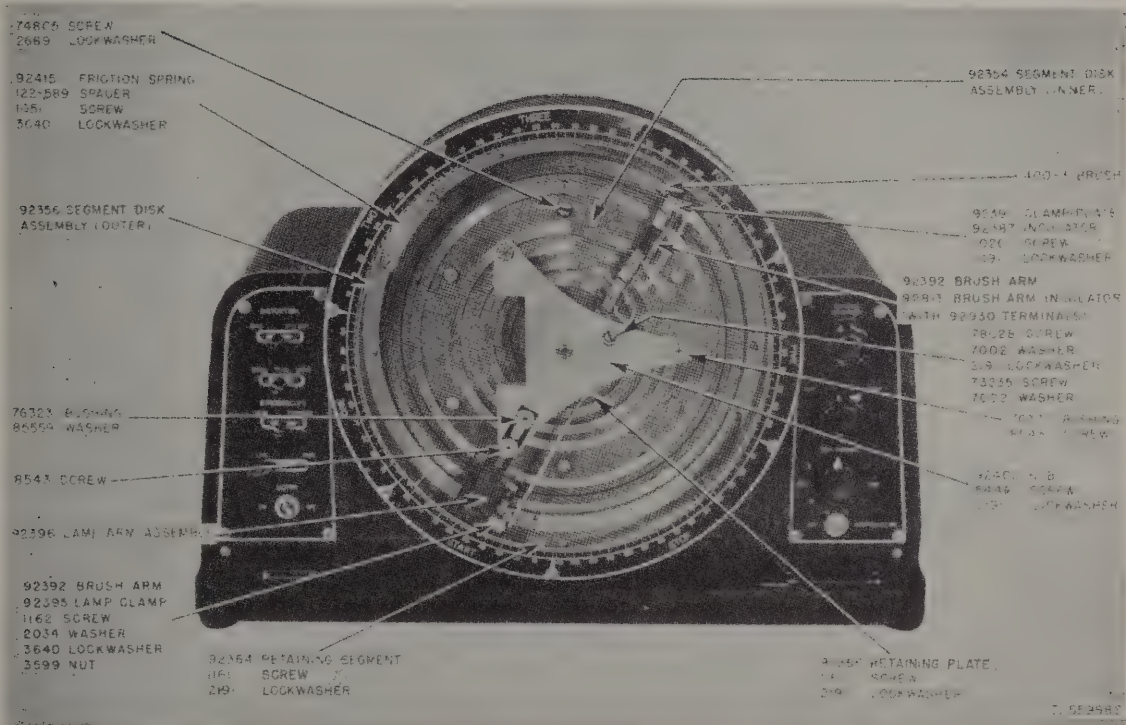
Distortion Test Set TS-383/GG, front view, face plate removed, location of parts.
